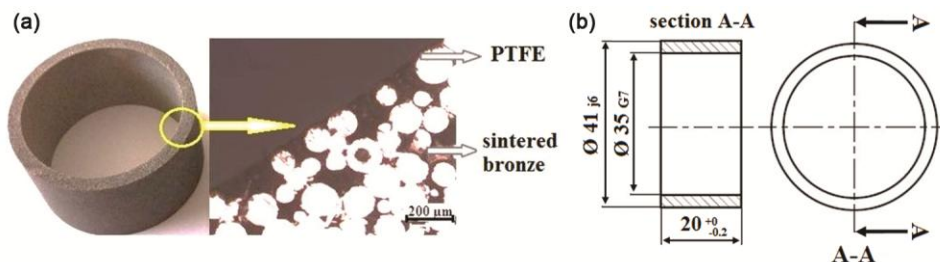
Coated/impregnated bushing specimen, (a) surface cross-section and (b) technical drawing
